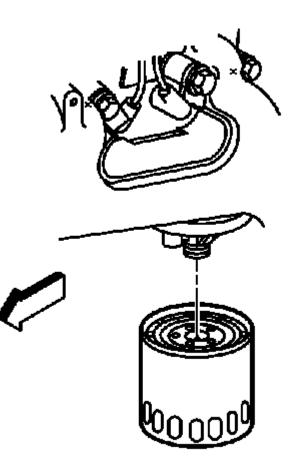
View Of Oil Filter Courtesy of GENERAL MOTORS CORP.
